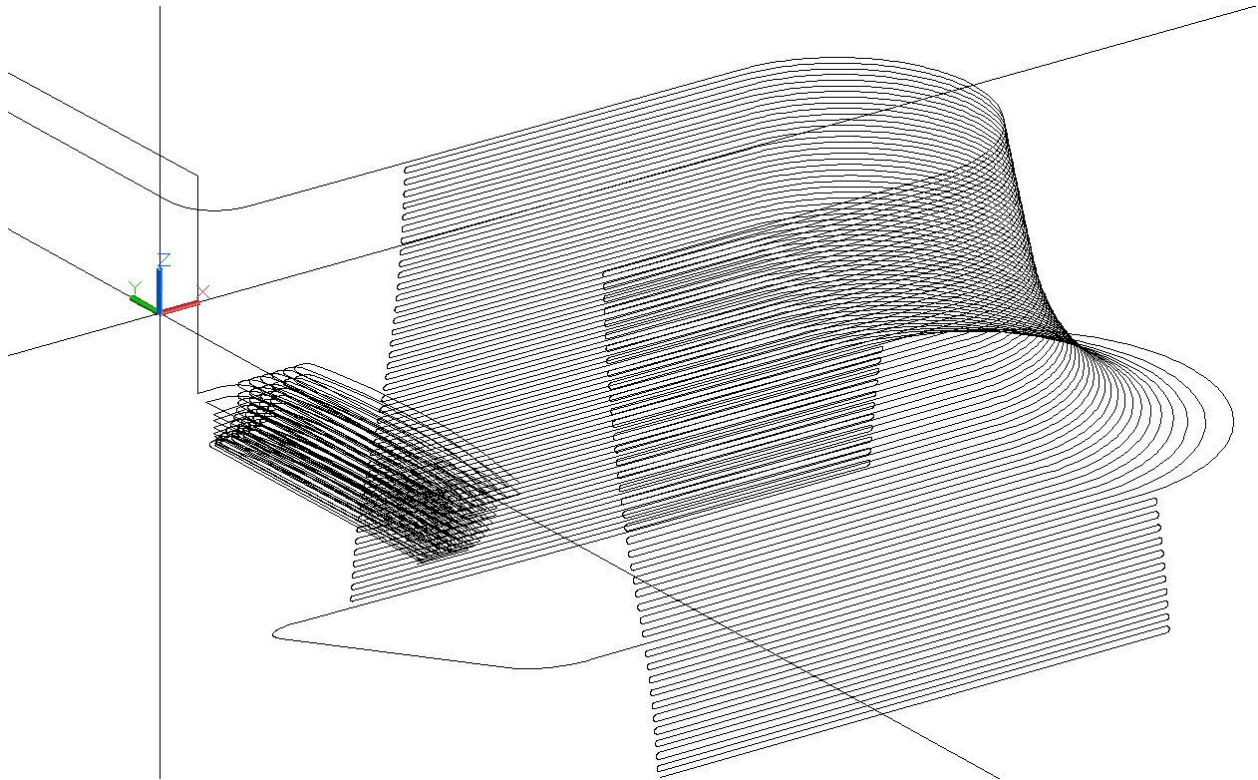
Heel Slotting Tool Path. The 2" diameter Slotting Bit cuts a groove and steps down and out to establish a radiused cut to match the contour of the one-piece flange.
